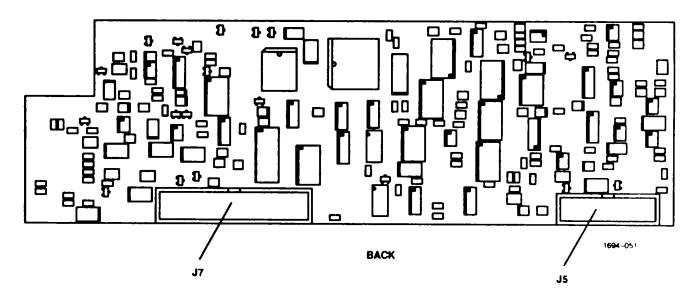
A10A1 Audio/Control PWB Assembly Component Location Diagram (1030-2100 Rev. D)
